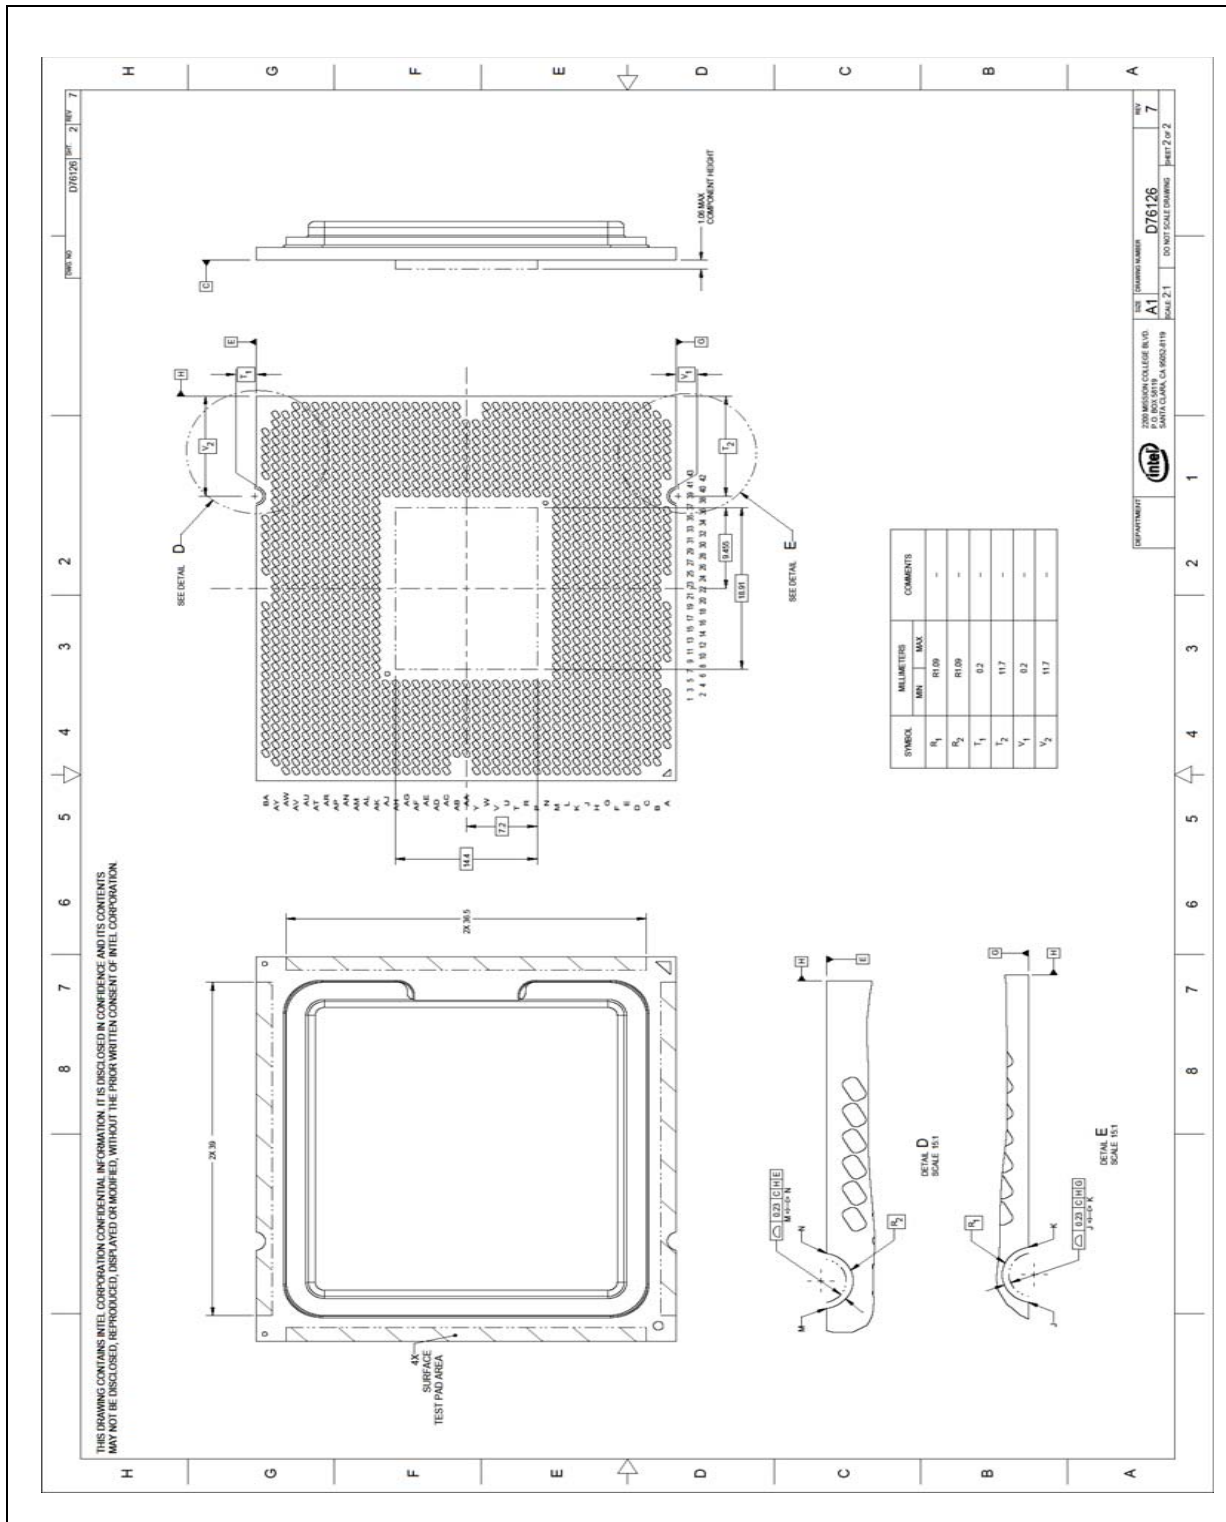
Processor Package Drawing (Sheet 2 of 2)
